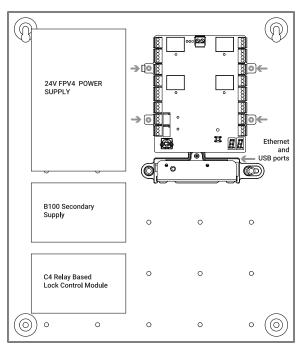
Access Control Core mounted with bracket (Ethernet and USB ports facing right) below 4-Port Board
